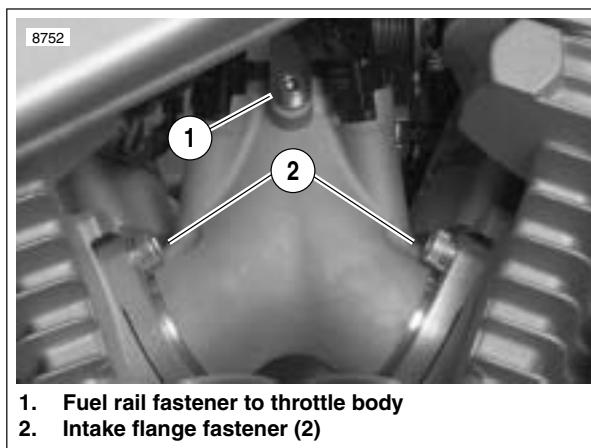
Intake Manifold Fasteners (gearcase cover side)
